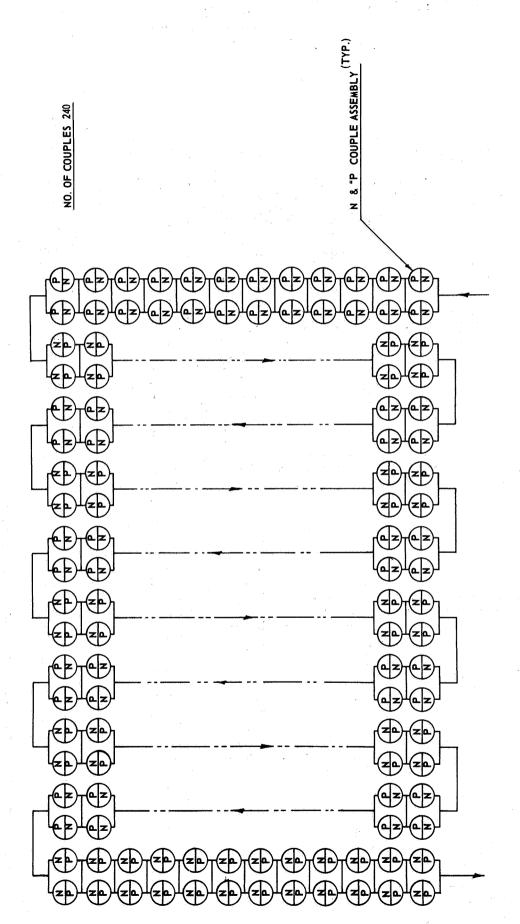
REFERENCE DESIGN-GENERATOR PANEL ELECTRICAL ASSEMBLY
